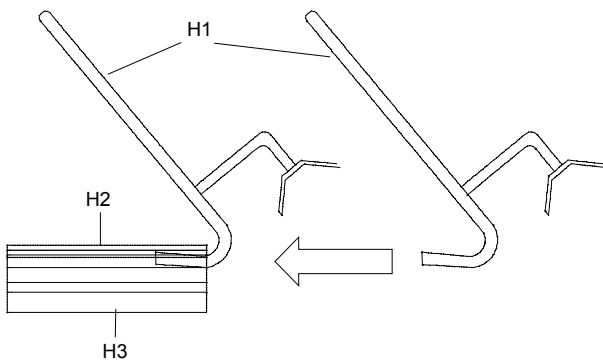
Putting the dismounting kit to the dismounting position for channel top parts (side view)
